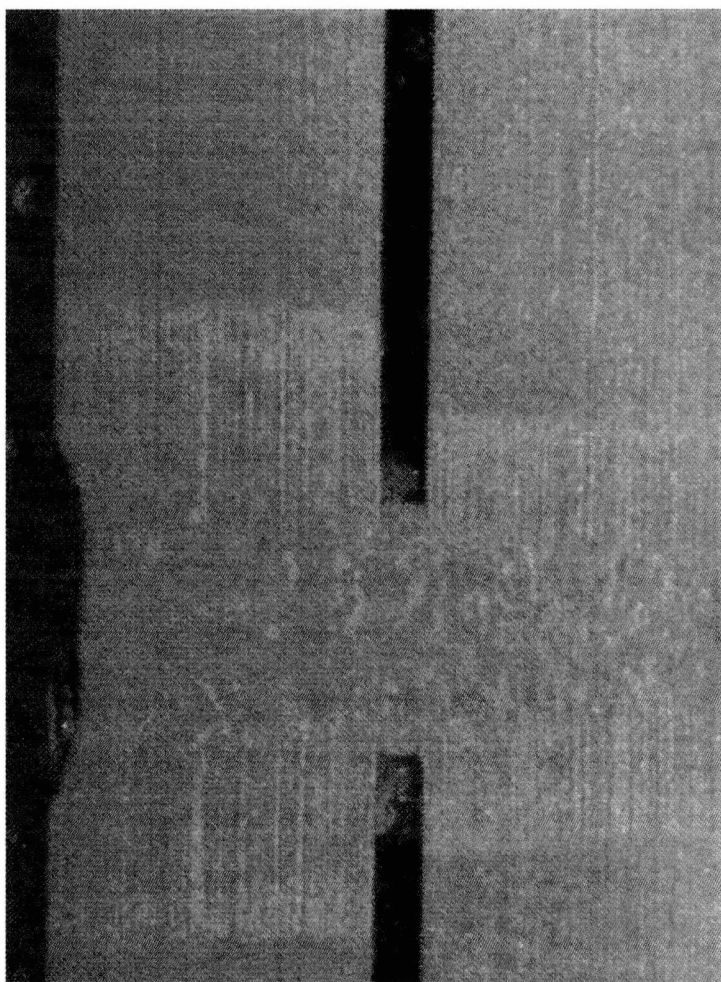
Laser Only Undercut Example. Weld performed on 80Y90T with a CO2 laser using helium gas (1850W, 1000mm/min., +1mm focal position, 8.6% gap).
